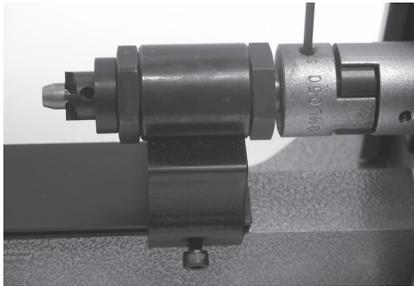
Remove Cutter Shaft from Shaft Coupler using 3/32" Hex Key Wrench
